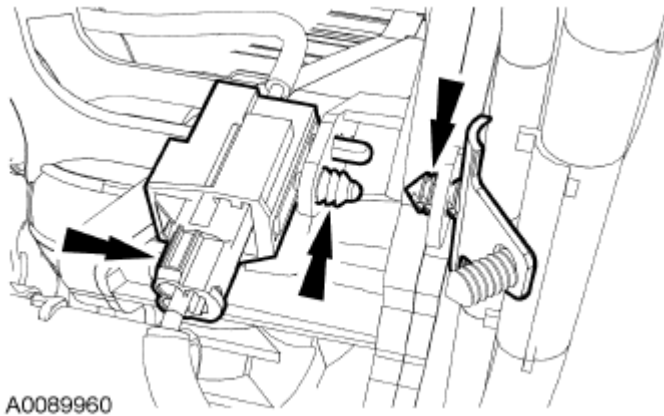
Locating Knock Sensor And Wiring Harness Retainers
